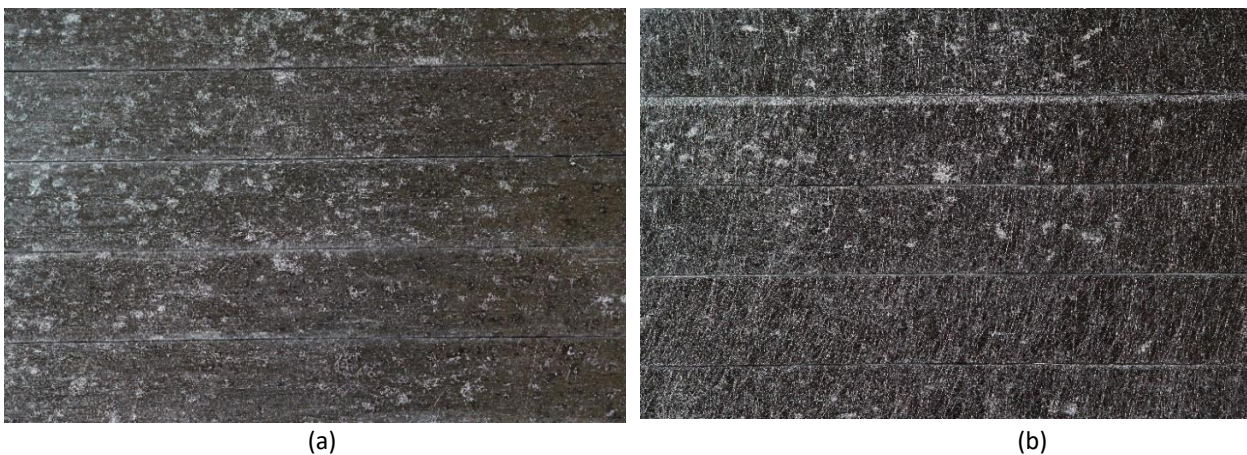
Macro-photographs of processed and peeled dynamic samples (a) binder surfaces (b) veil surfaces
